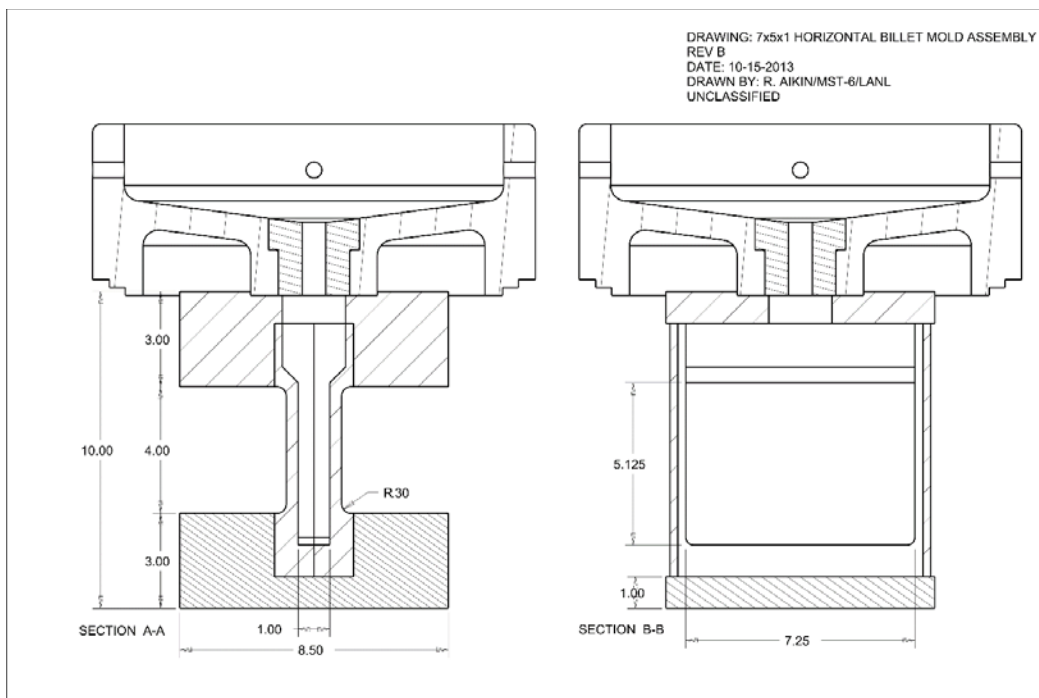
Mold drawing with crucible. This drawing was also provided to PNNL to develop the sampling plan.
